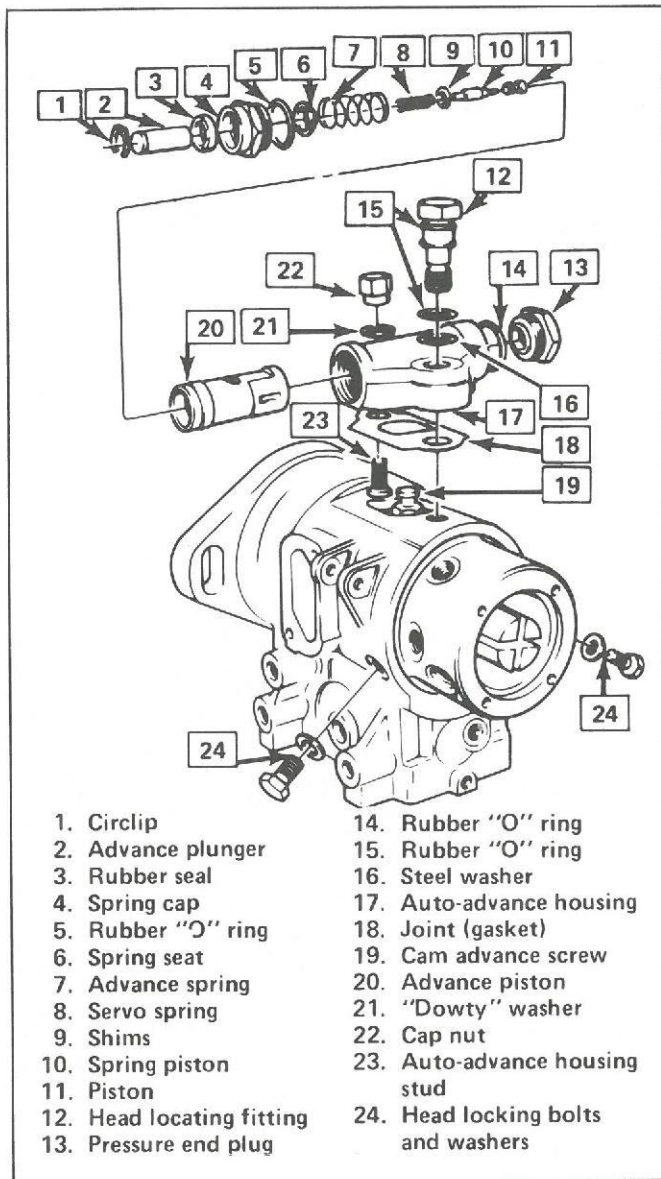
C5-2—CAV Pump Auto-Advance Unit
